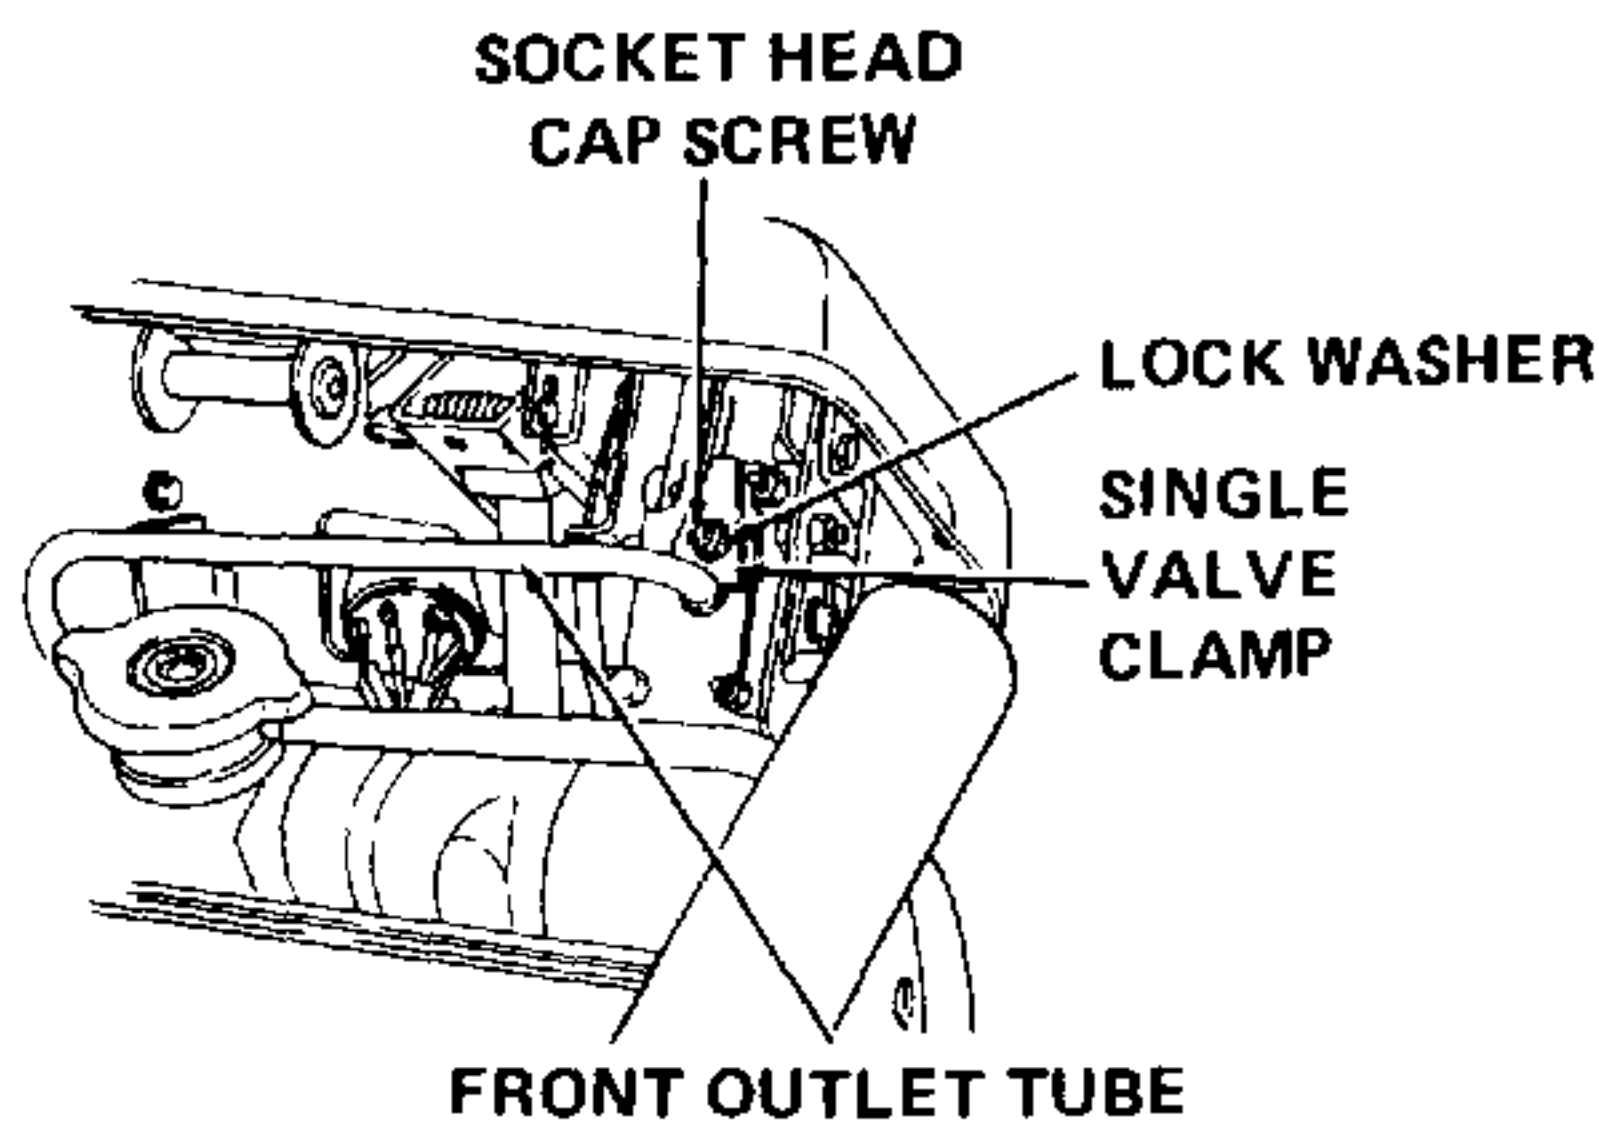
Further Installation of Front Outlet Tube (Models 1782 and 2182 Only).
